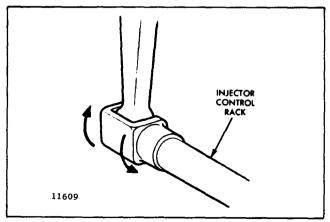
Checking Rotating Movement of Injector Control Rack
